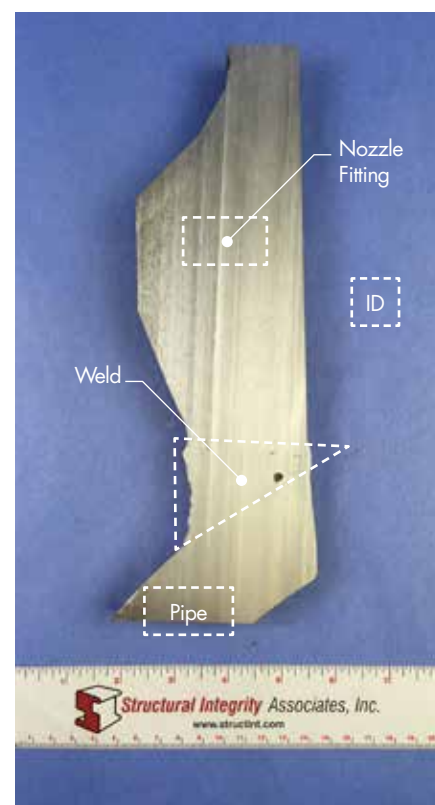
Example of a cross-section through a weld-o-let showing the small size of the weld compared to the thickest part of the nozzle fitting.
